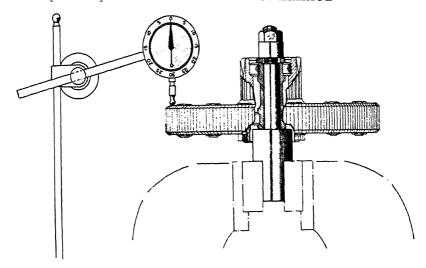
Checking alignment of intermediate gear and pinion unit.
